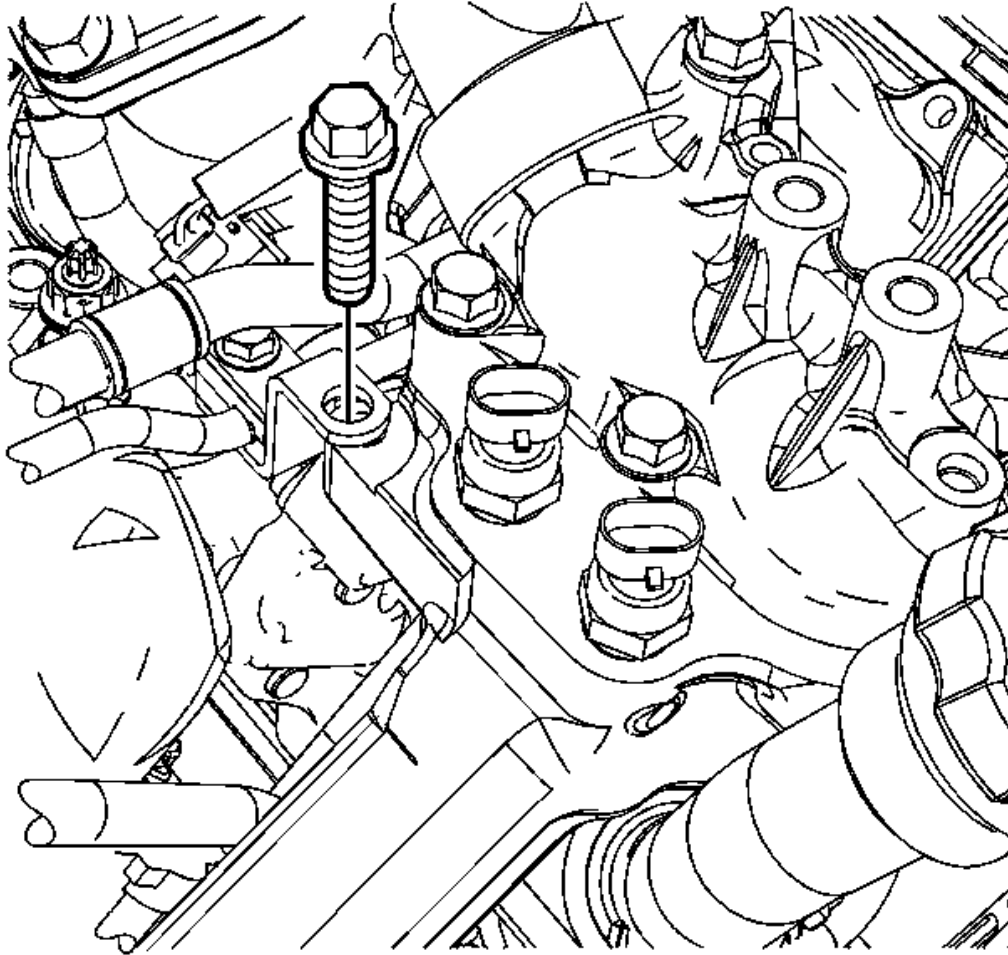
View Of Wiring Harness Bracket & Bolts
